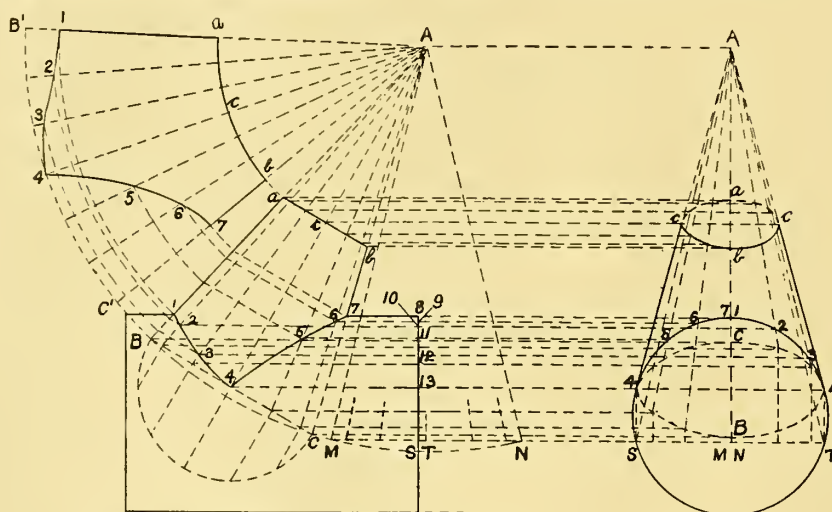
SIDE ELEVATION AND DEVELOPMENT OF CONE.
